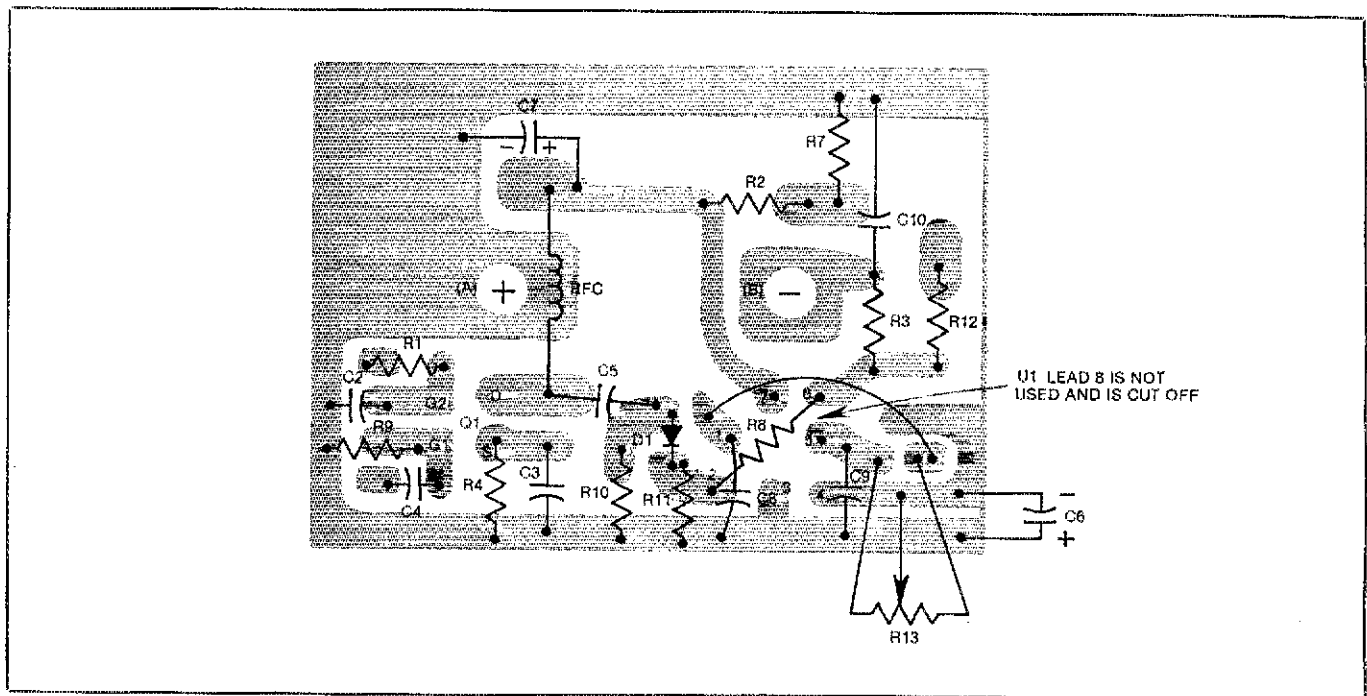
Component placement guide for null-detector circuit board. Component leads are soldered directly to the foil.
